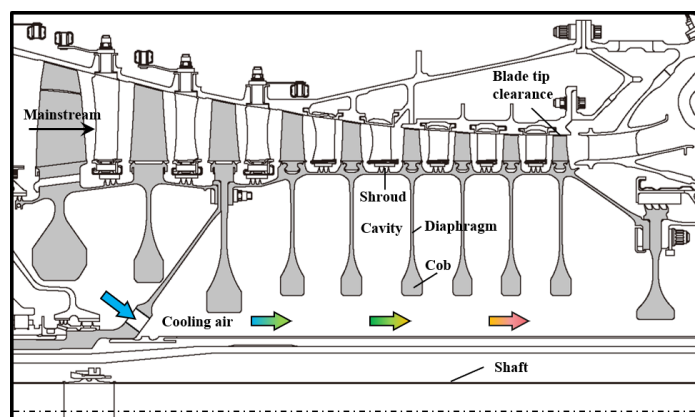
A Cross-Section of a High-Pressure Compressor Rotor
